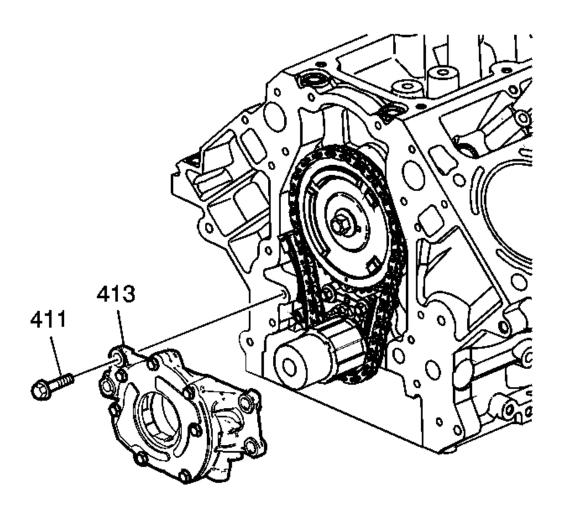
View Of Oil Pump & Bolts Courtesy of GENERAL MOTORS CORP.
